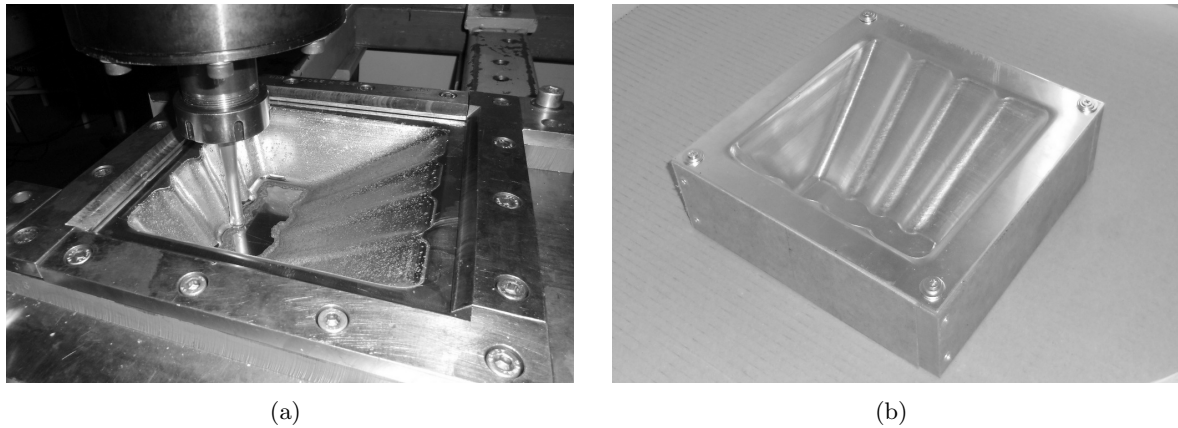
Manufacture of the hand layup sheet metal mould: (a) forming operation (b) assembled mould
